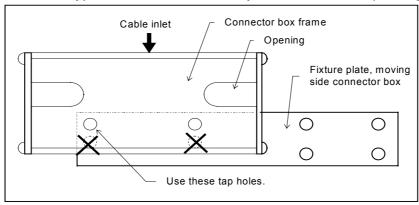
B type combination: Assembly of connector box (moving side) and fixture plate
